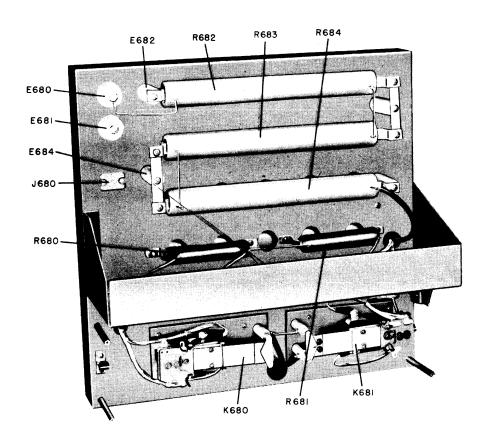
Modulator Assembly, Modulation Transformer and Filter Chassis, Location of Parts
